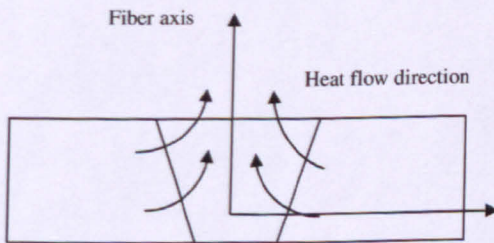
Fiber axis in a typical weld geometry.
